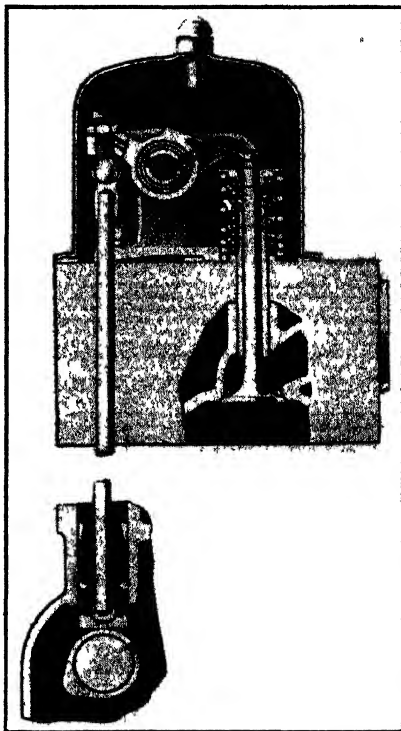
Valve and valve-operating mechanism for overhead-valve automobile engine.
